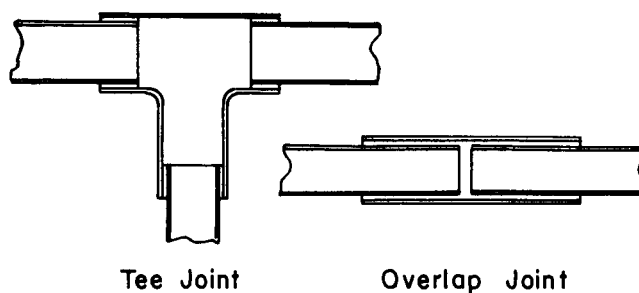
DESIGNS FOR CYLINDRICAL JOINTS
